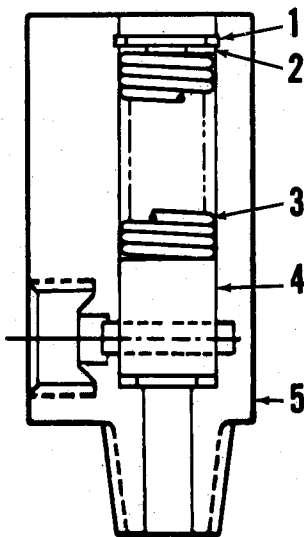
A—Cross-sectional view of Dual Power regulating valve.
